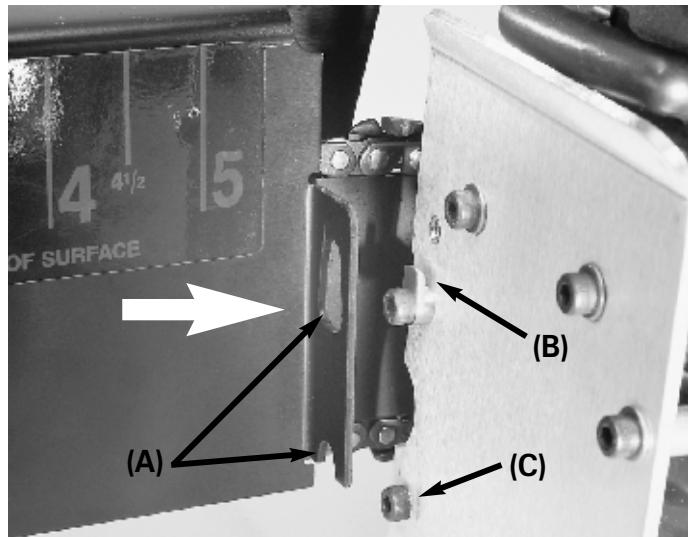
Slide mounting slots (A) onto locking key (B) and bolt (C)
